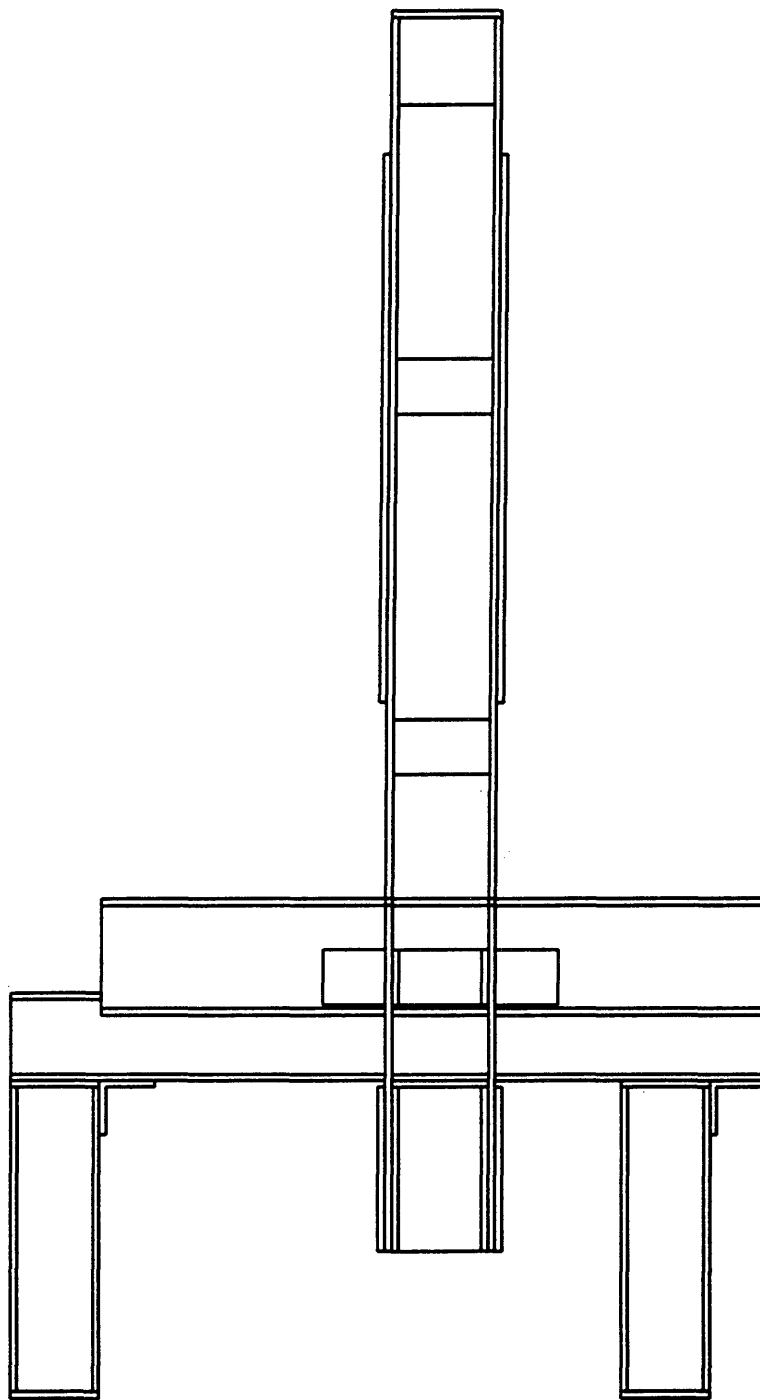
Side View of the Hydraulic Press Without Hydraulic Cylinder Support Structure
